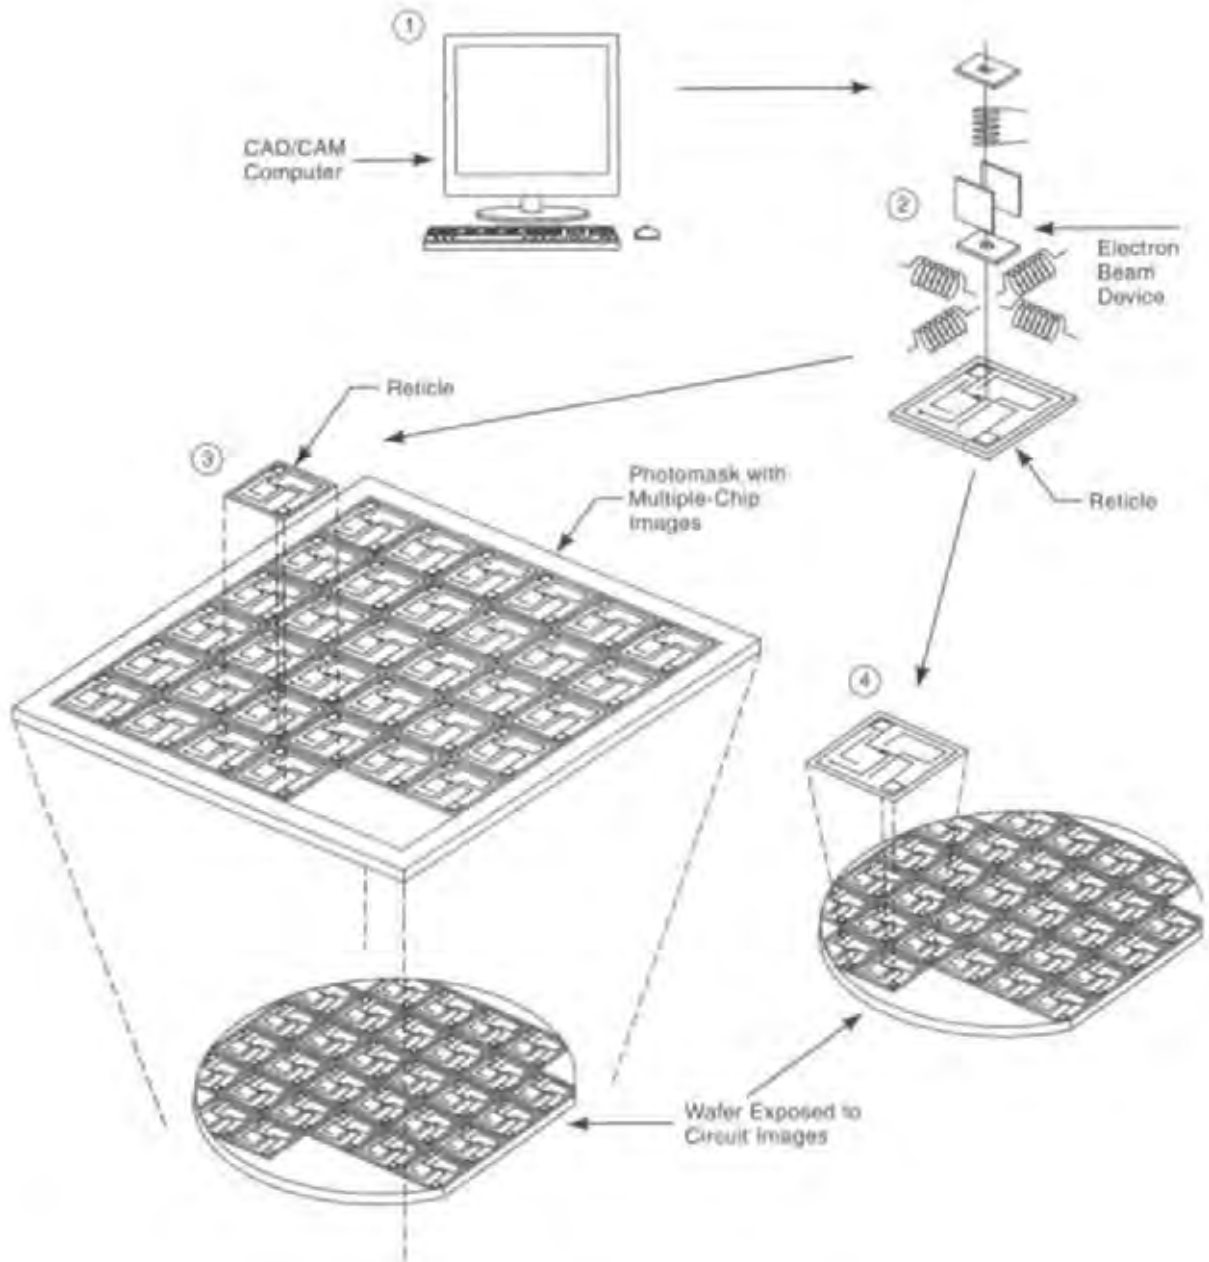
K3b1a-1 Fabrication and use of a reticle and a mask to expose the wafer surface with the design layout for one layer of the chip circuit. 1) The process starts with a CAD dimensioned design layout of one layer of the chip. 2) That design layout is fed to an electron beam or laser beam scanner, which exposes a resist surface on a quartz-glass reticle to the design. 3) In one method, the reticle design is transferred to a multiple-image quartz-glass mask by a series of contact printings. The mask then has multiple images of the chip circuit layout. These images are projected all at one time from the mask to the wafer to expose a resist on the wafer surface. 4) In the other method, the image on the reticle is projected directly to the wafer with a step and repeat exposure and no multiple photomask is used.
